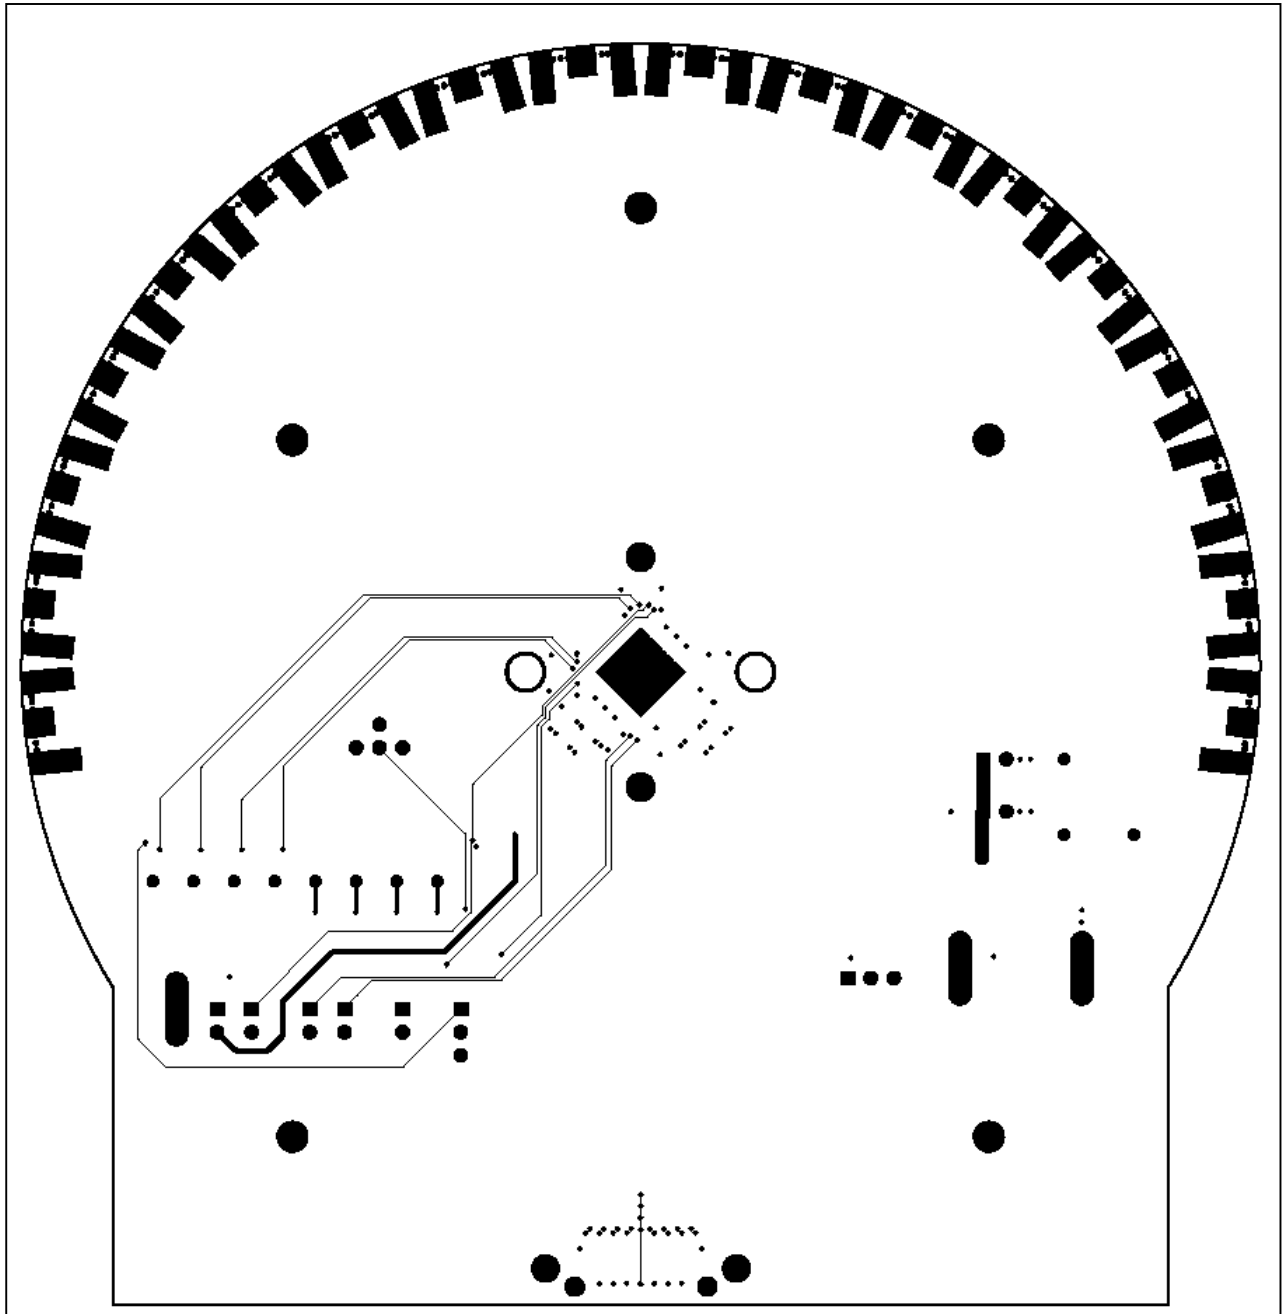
MAX3983 EV Kit PC Board Layout – Bottom (Signal), Layer 6
